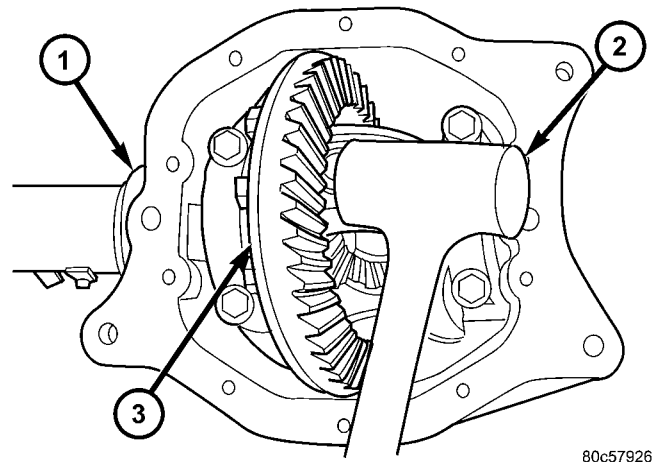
SEAT DUMMY BEARING RING GEAR SIDE
